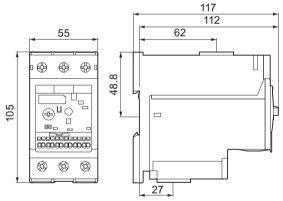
3RB3.3.-..D0 and 3RU2936-3AA01
